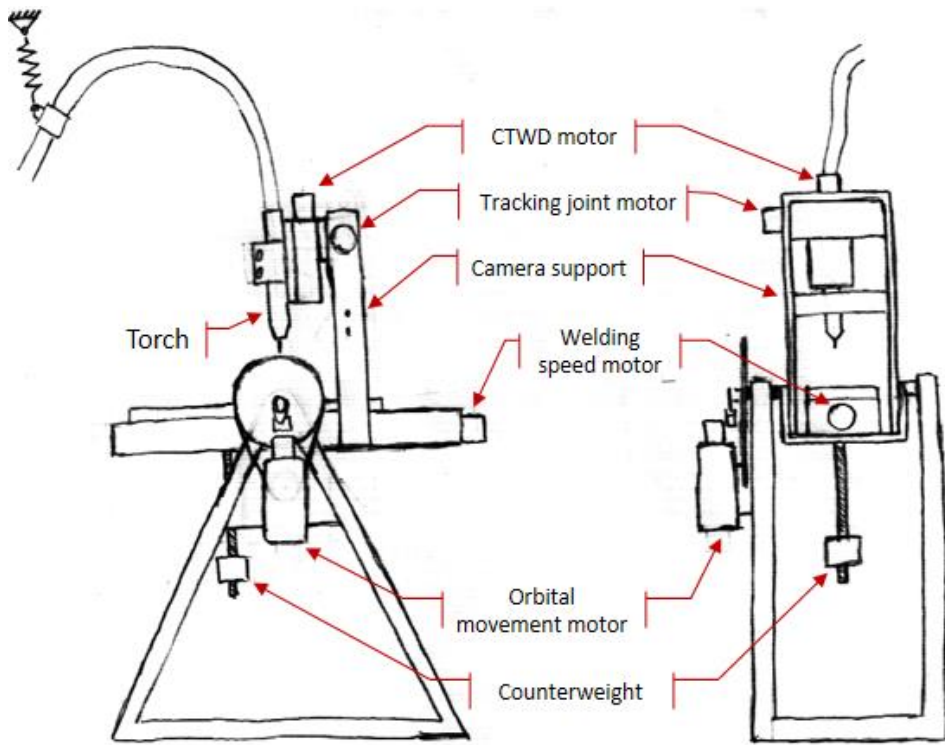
Mechanic structure for robotic emulator of orbital welding process.
